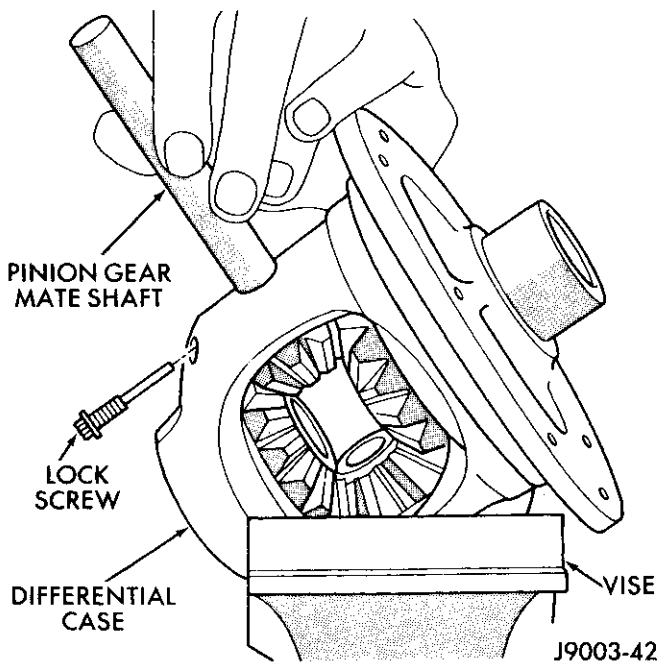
Pinion Gear Mate Shaft Lock Screw
